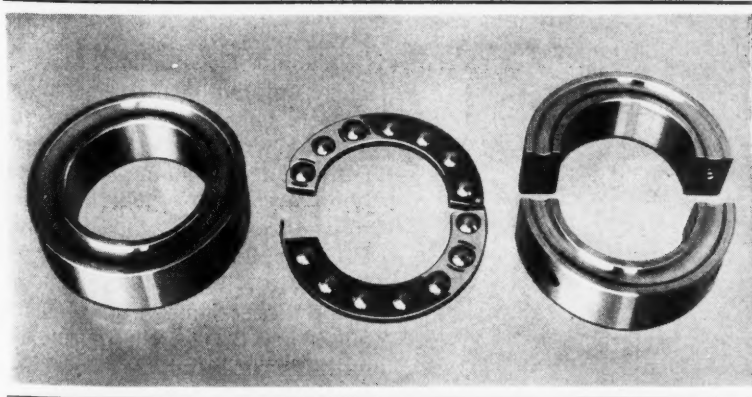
A Ball Thrust Bearing in which Both Races and the Cage are in Two Pieces to Permit Convenient Assembly
